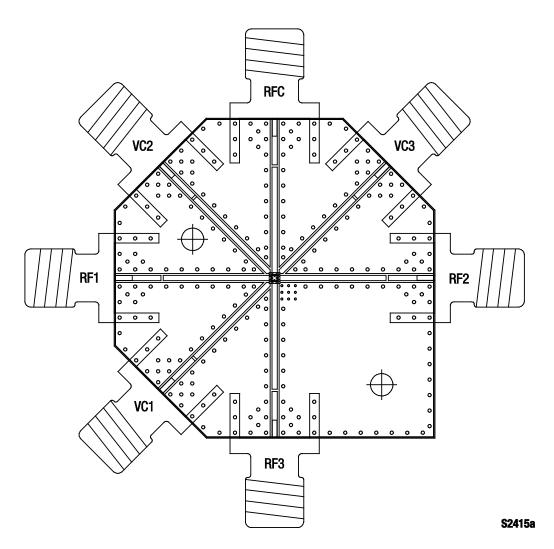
SKY13386-000 Evaluation Board Assembly Diagram
